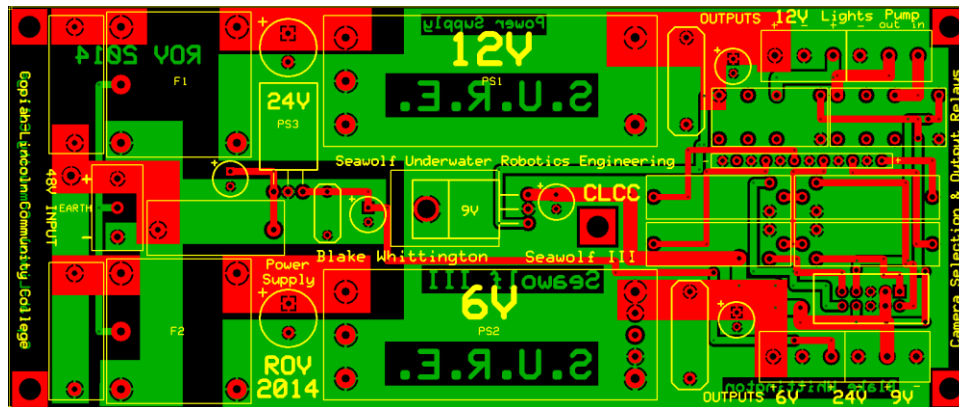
Two sided PCB design of the power supply board drawn by our Electronics Engineer
